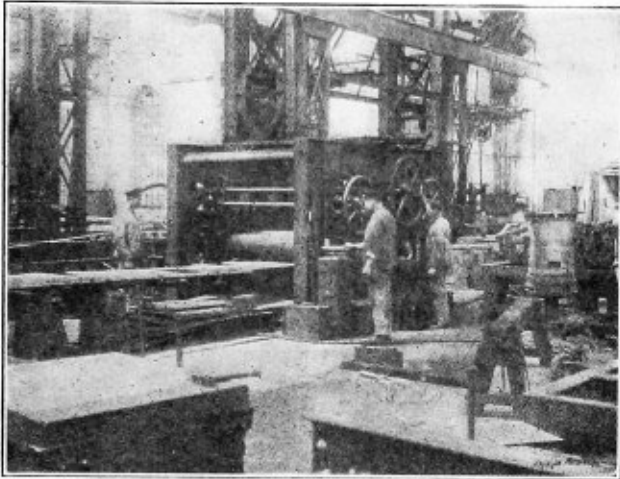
STRAIGHTENING THE FRAME PLATES.
